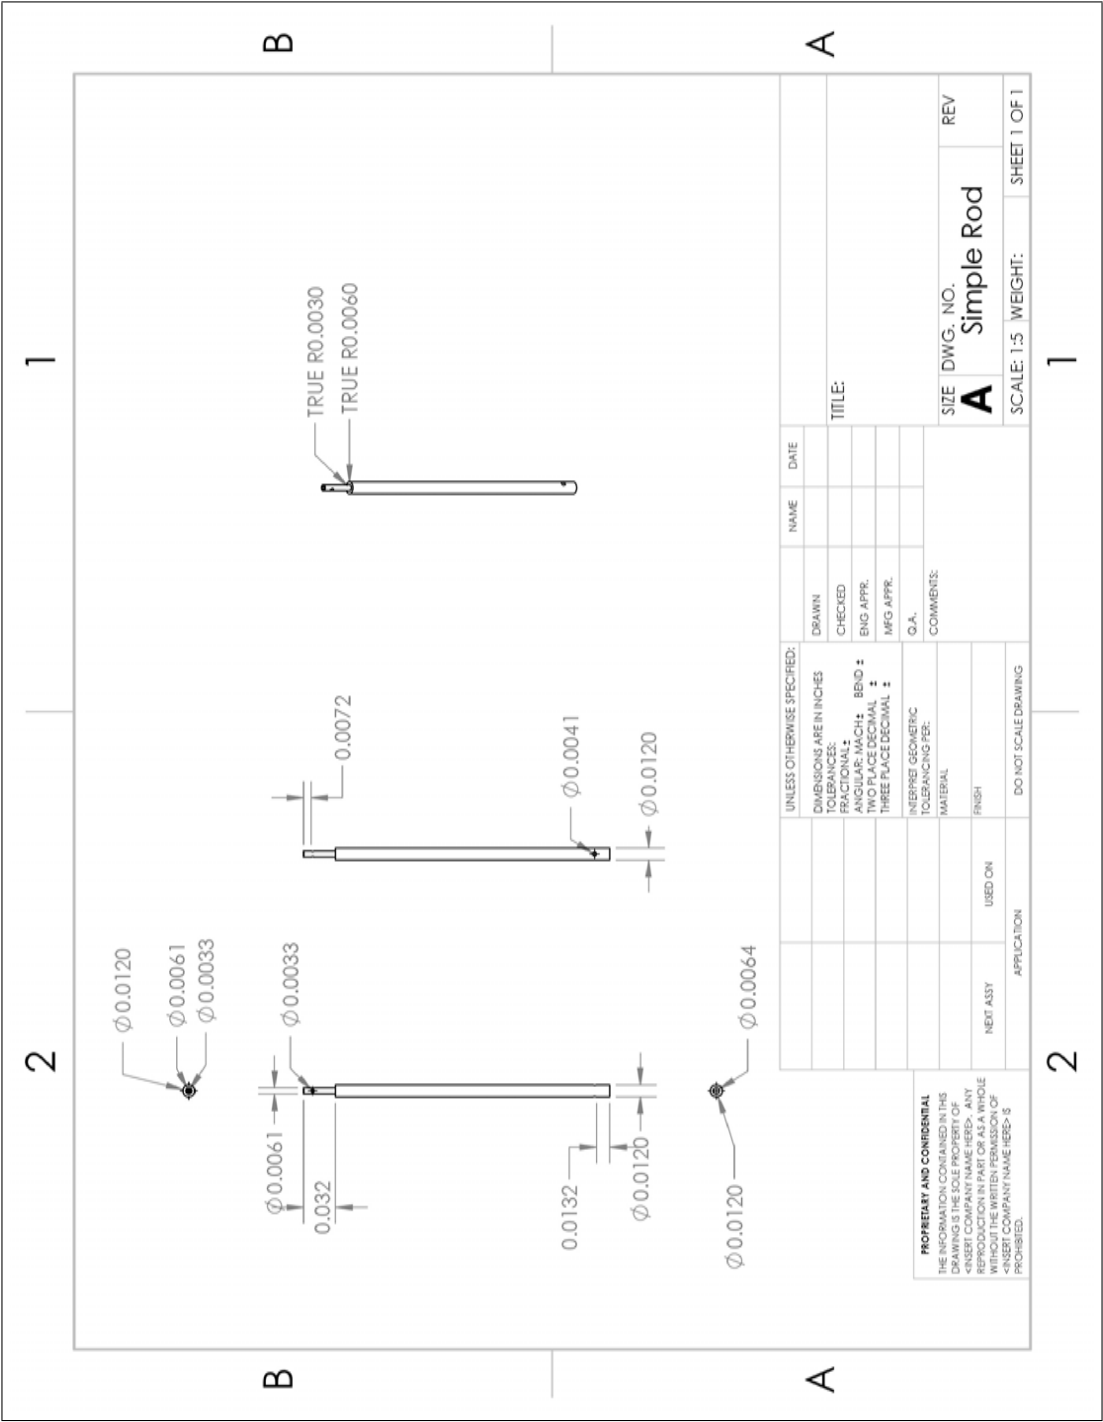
Drawing of Simple Rod for vertical rod and linear motor
